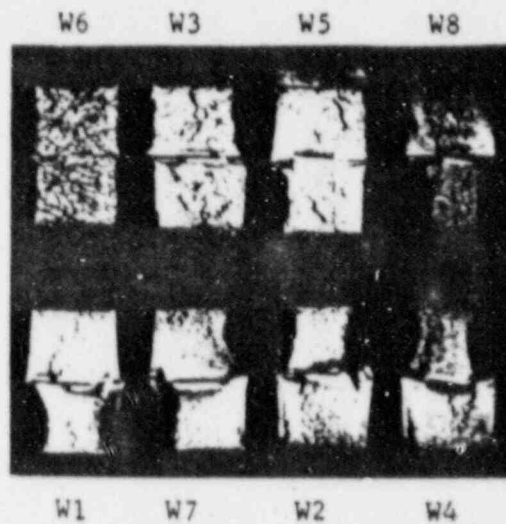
CHARPY IMPACT SPECIMEN FRACTURE SURFACES FOR
